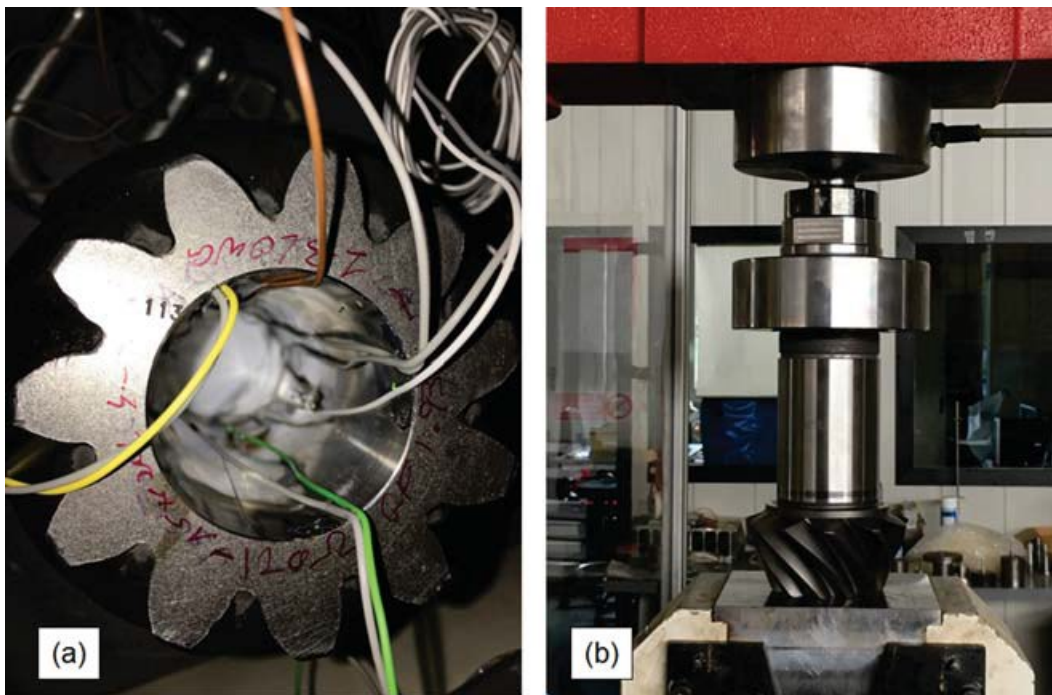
(a) Holed pinion with the applied strain gauges; (b) Shaft loading and constraining on the standing press
